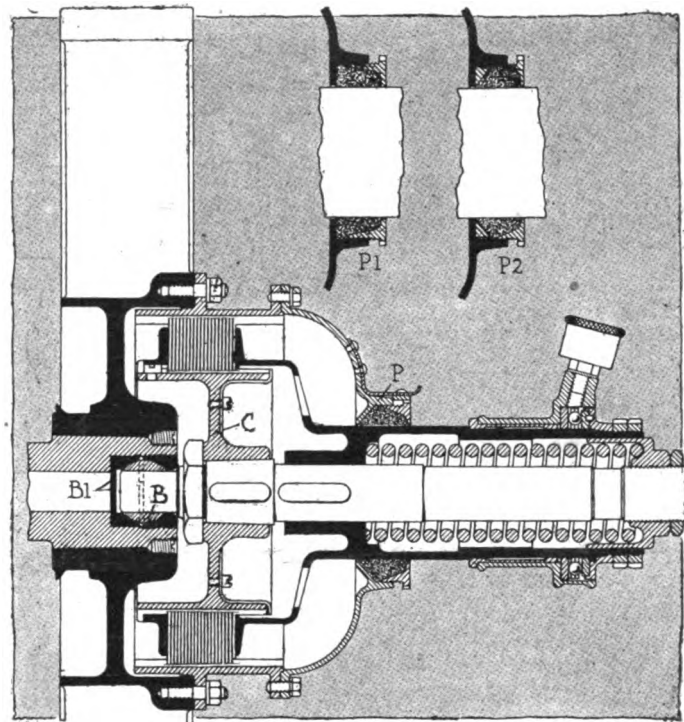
Fiat 65-disk clutch. Note insertion into crankshaft end to secure alignment. Above are shown two views of the stuffing box fitted to prevent oil from working out of the clutch housing
